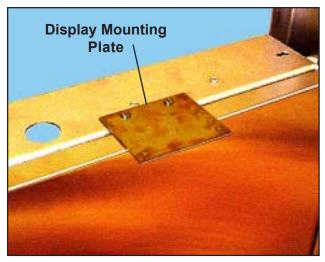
Mounting Plate on Sliding Carriage Cross Member
